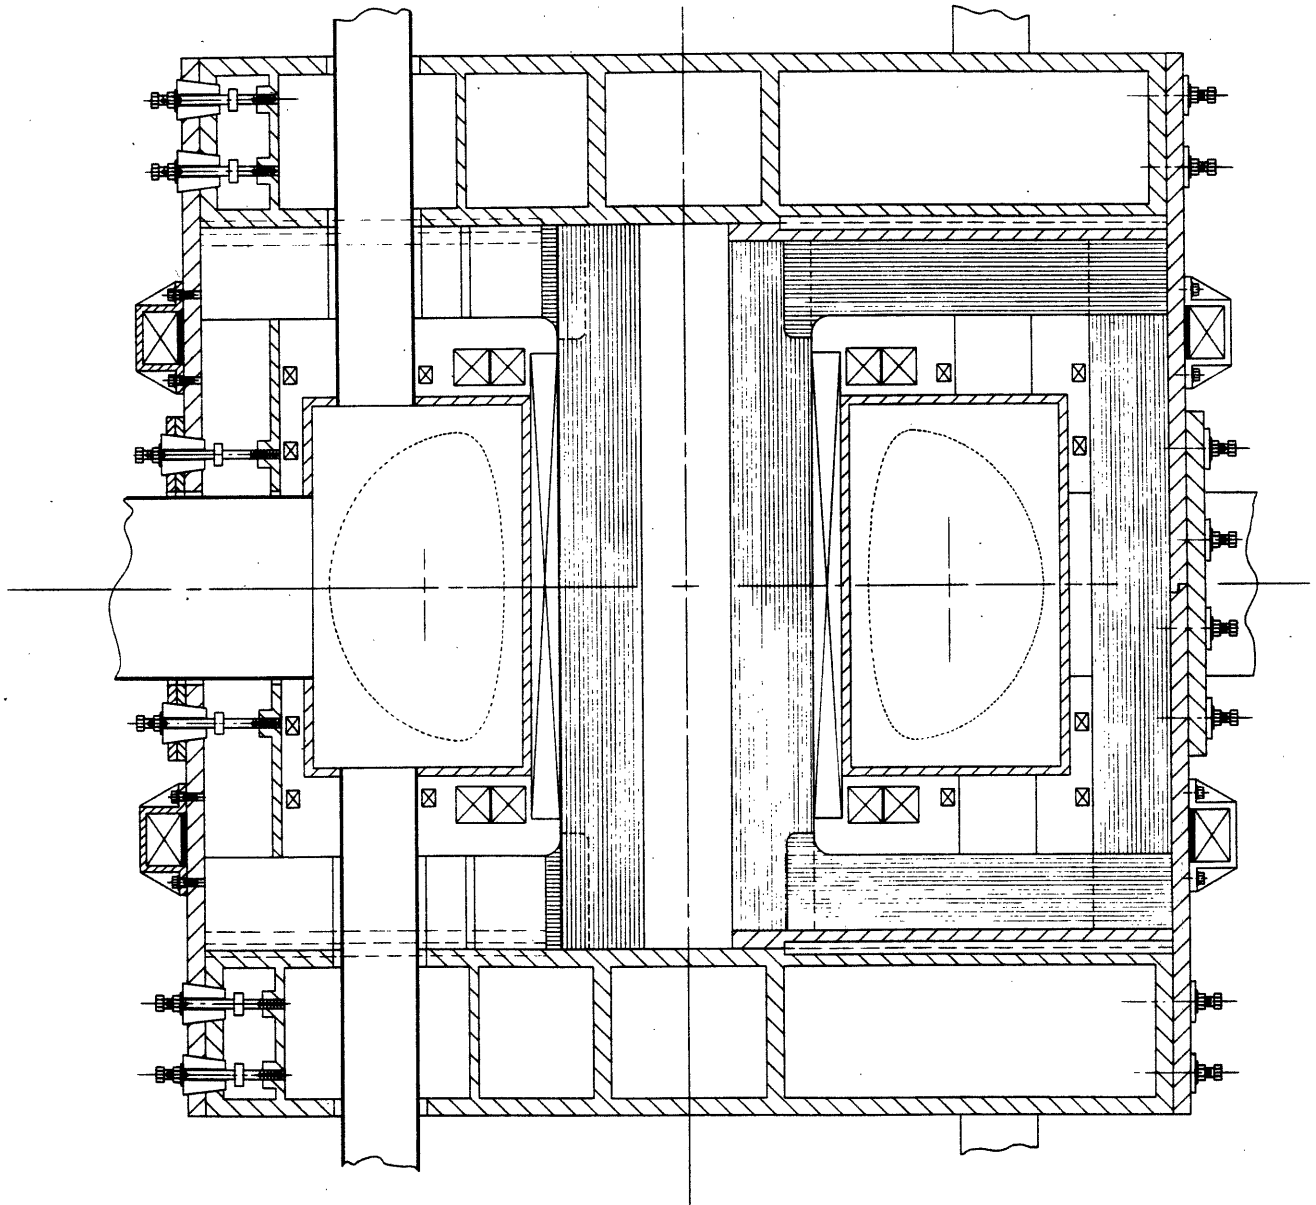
The Alcator C-MOD Design Concept: Cross-sectional View
